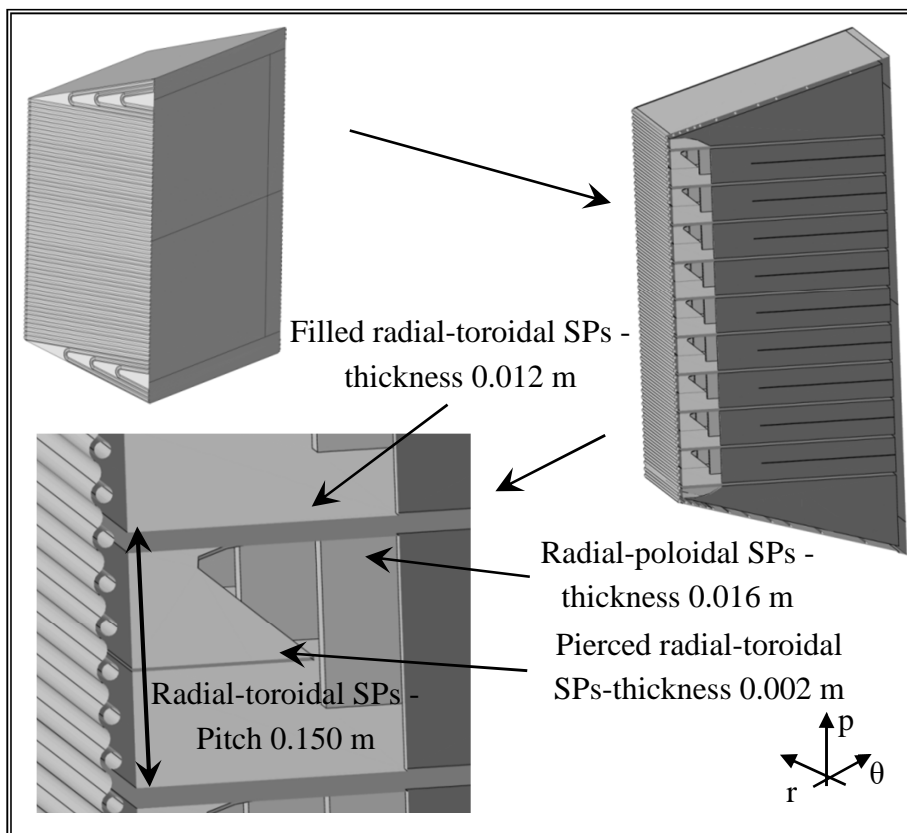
Configuration 7 - 3D geometric model exploded view.
